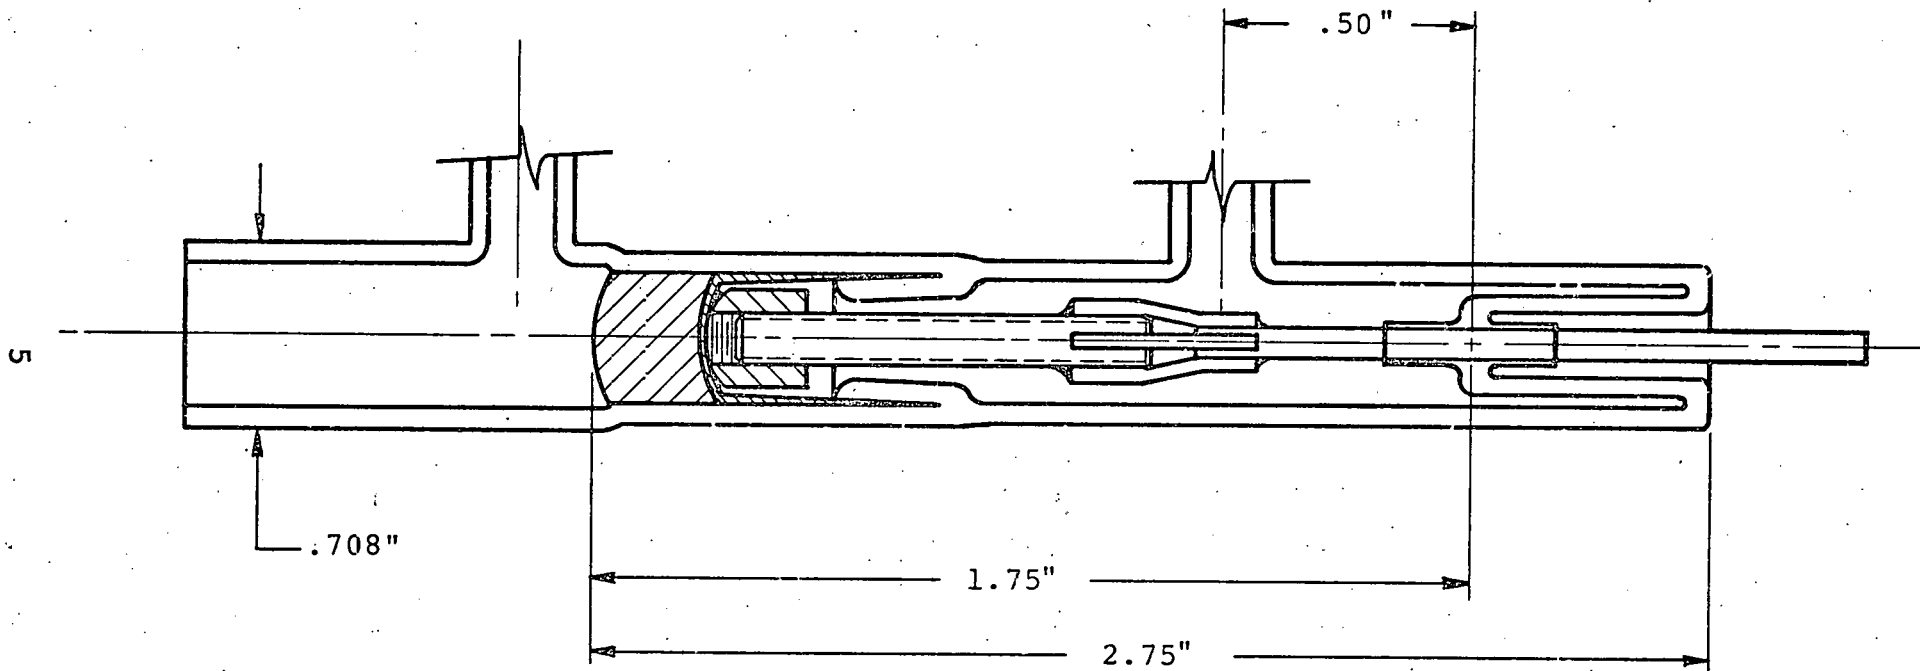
16mm Bore Molybdenum Cup Seal Lamp Electrode Assembly
